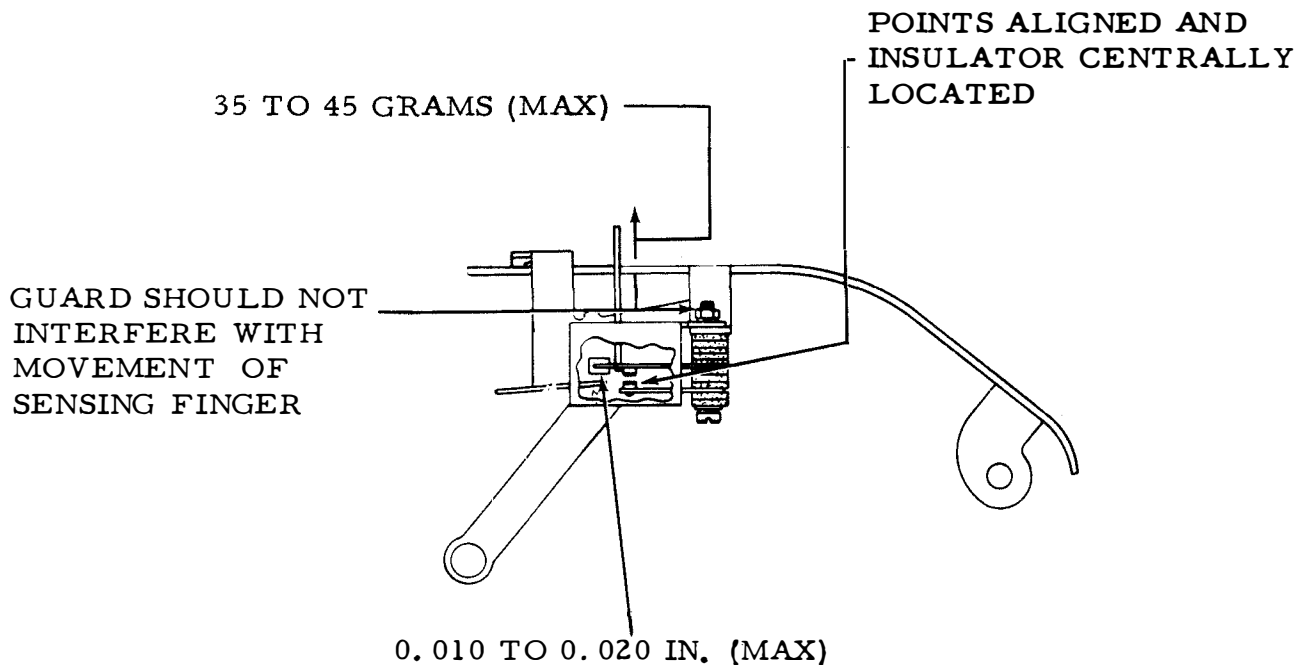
Tape Absence Long Contact Spring, Contact Assembly, and Short Contact Spring
